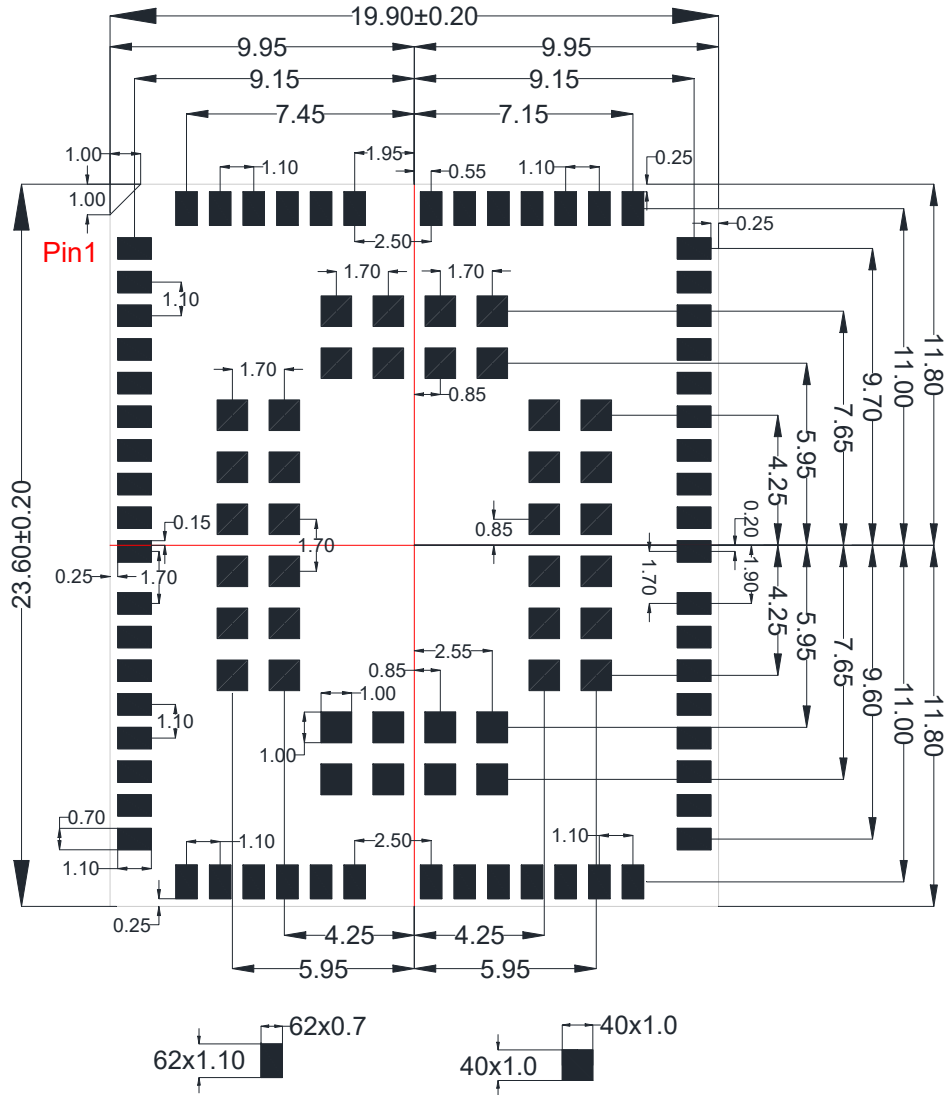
Module Bottom Dimensions (Bottom View, Unit: mm)
